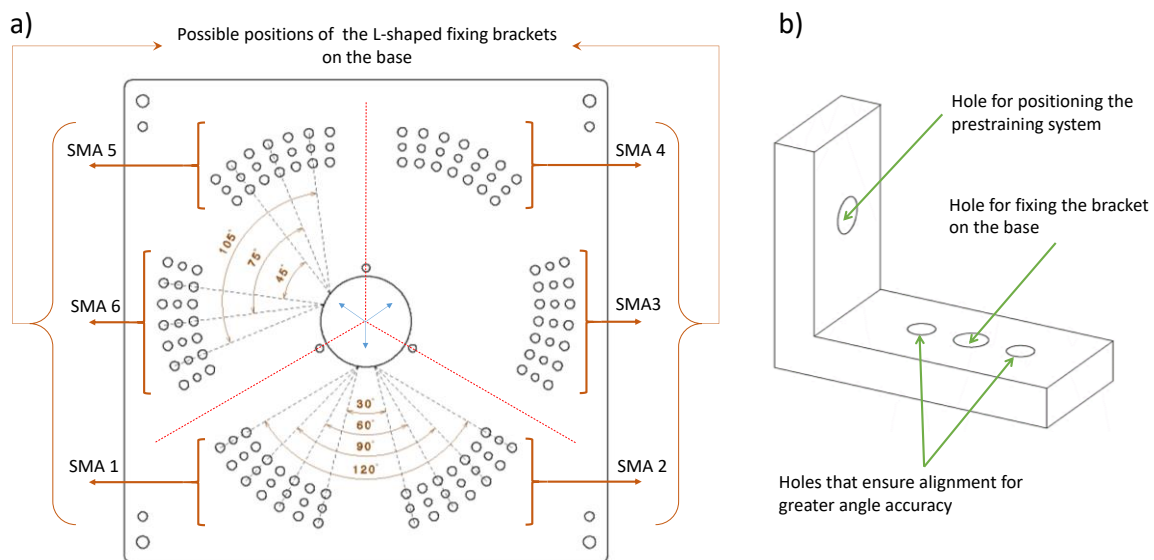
Details about the components that ensure positioning of SMA wires. (a) Fixed base. (b) L-shaped fixing bracket.
